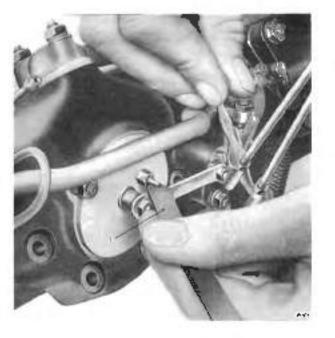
Adjusting thermoster cell — ST cars . RECLA GAUGE IN POSITION
